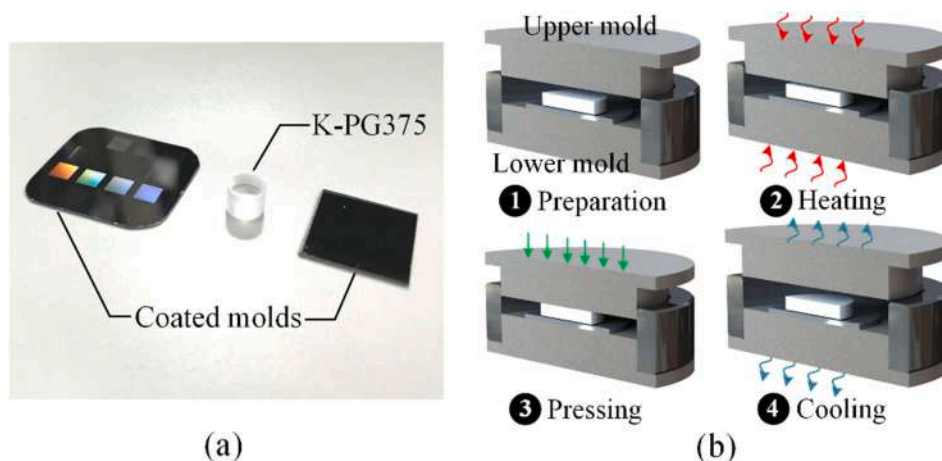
(a) Photography of the coated Si mold inserts and a cylinder-shaped glass substrate, and (b) schematic diagrams of the PGM process, 1. preparation; 2. heating; 3. pressing; 4. cooling.
